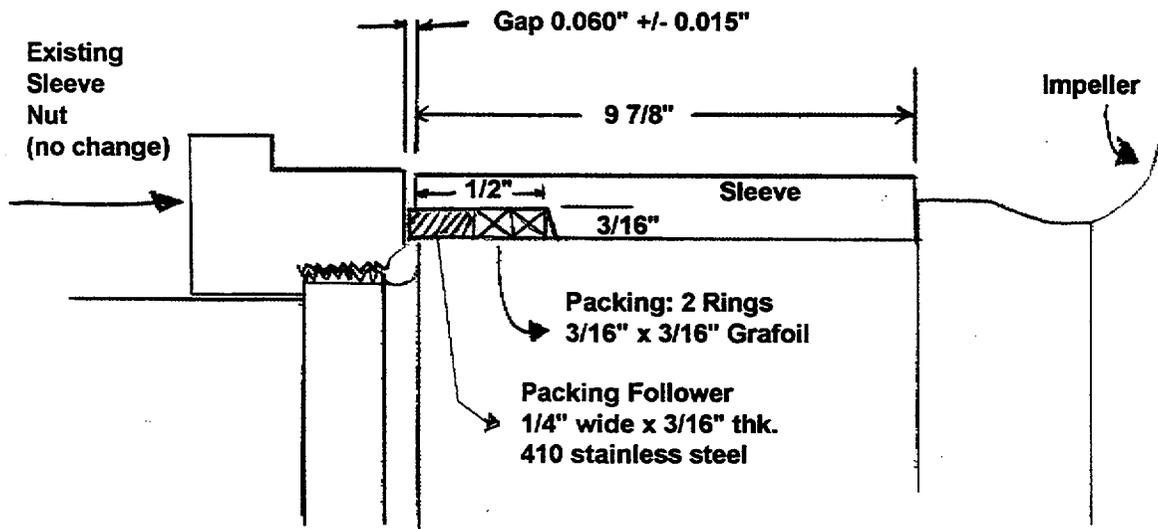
Proposed Modification for Shaft Sleeve and Sleeve Lock Nut
